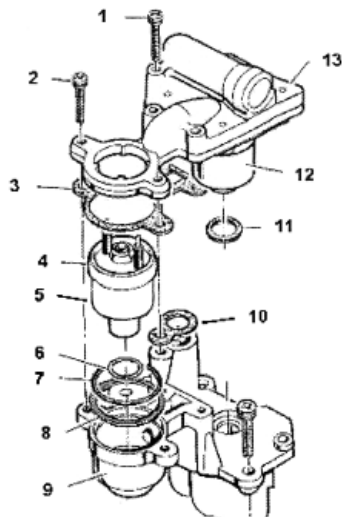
Generic 1 bbl Throttle Body Unit shown
